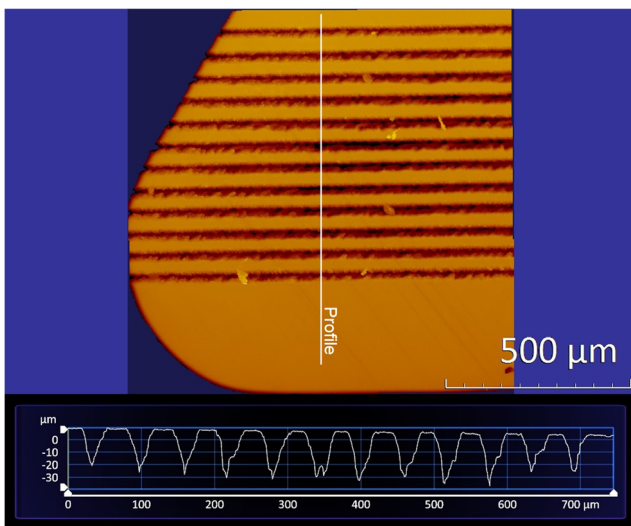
3D optical profile of the texture of a tool showing shape and dimensional features
